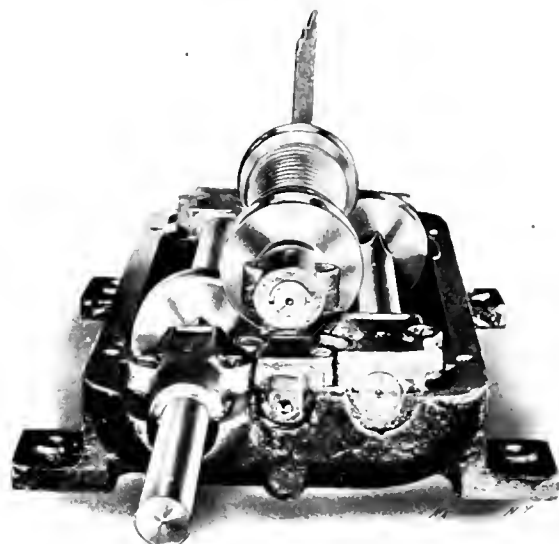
End View of the Drive, showing the Method of Supporting and Shifting the Intermediate Shaft to change the Speed.
